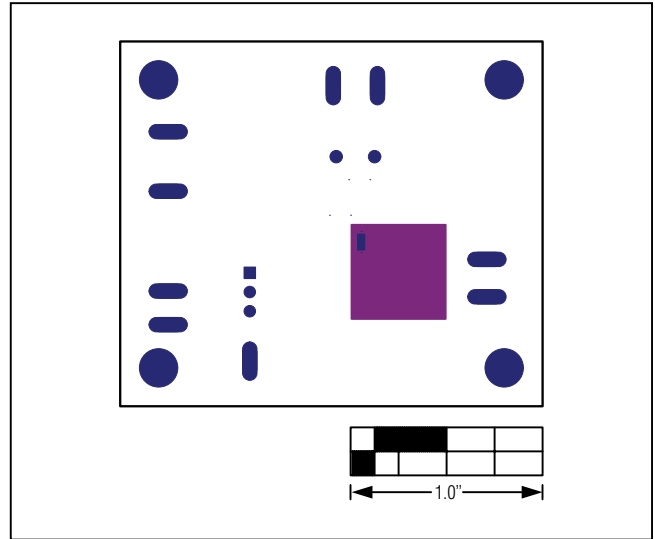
MAX17501B/MAX17501F EV Kits PCB Layout—Bottom Solder Mask
